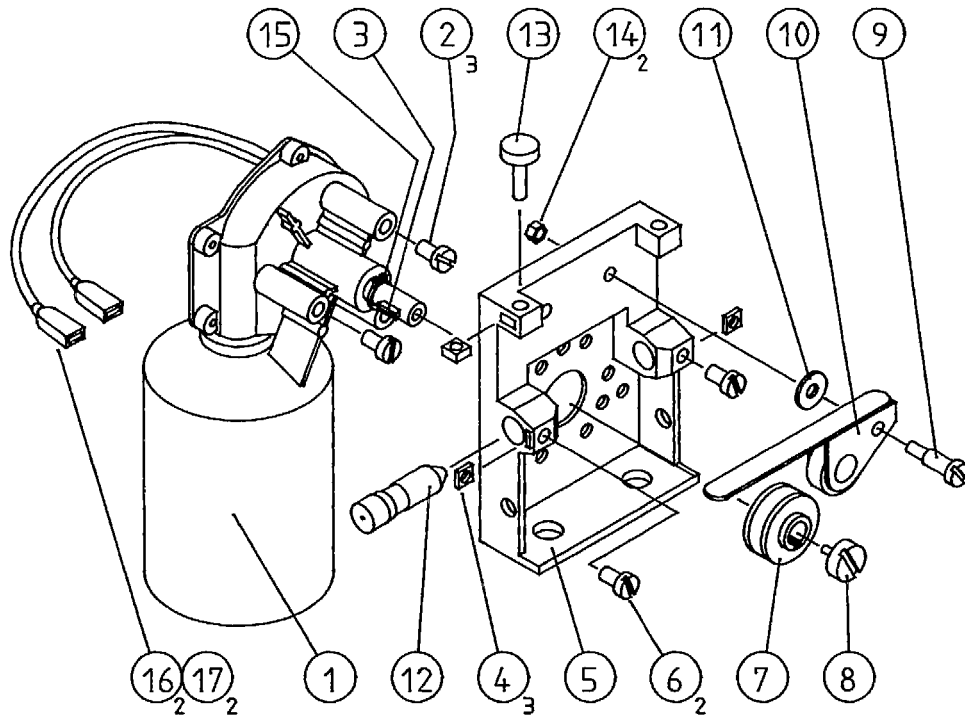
W26 TWO ROLL DRIVE ASSEMBLY
